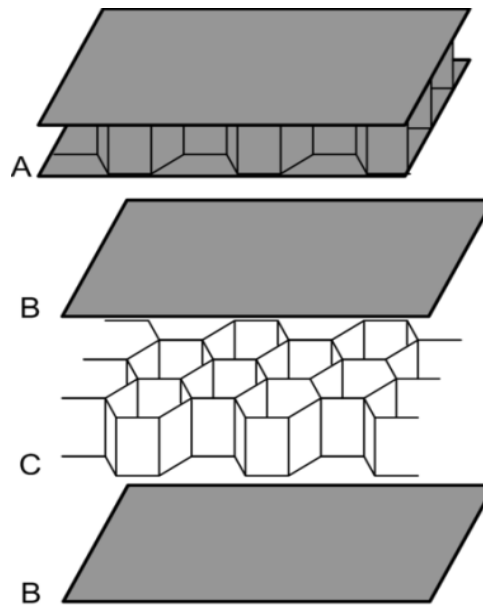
Representation of an assembled composite sandwich (A), and its constituent face sheets or skins (B) and honeycomb core (C).
